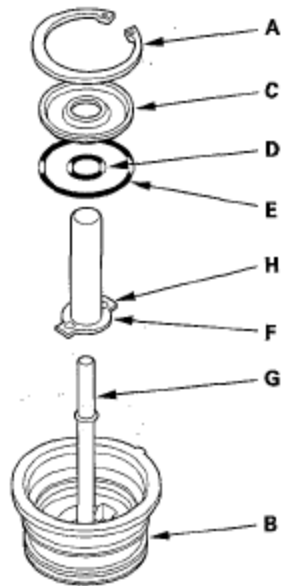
Identifying Feed Pipe Guide, O-Rings And 1st Clutch ATF Feed Pipe
